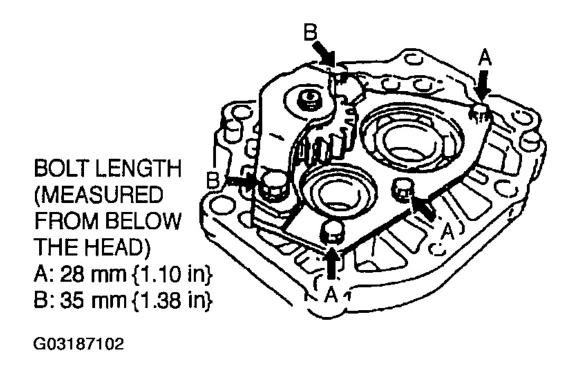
Identifying Bearing Cover Installation Bolts Courtesy of MAZDA MOTORS CORP.
